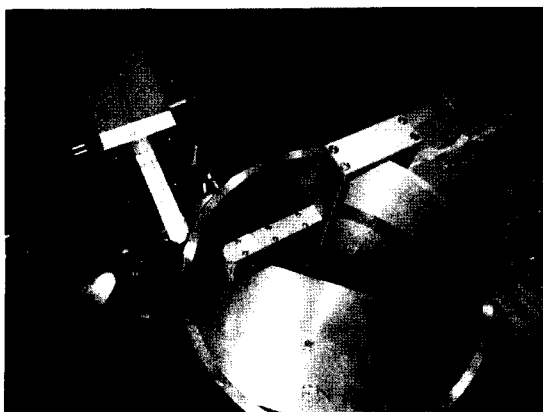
Welded specimen of 316L stainless steel pipe
